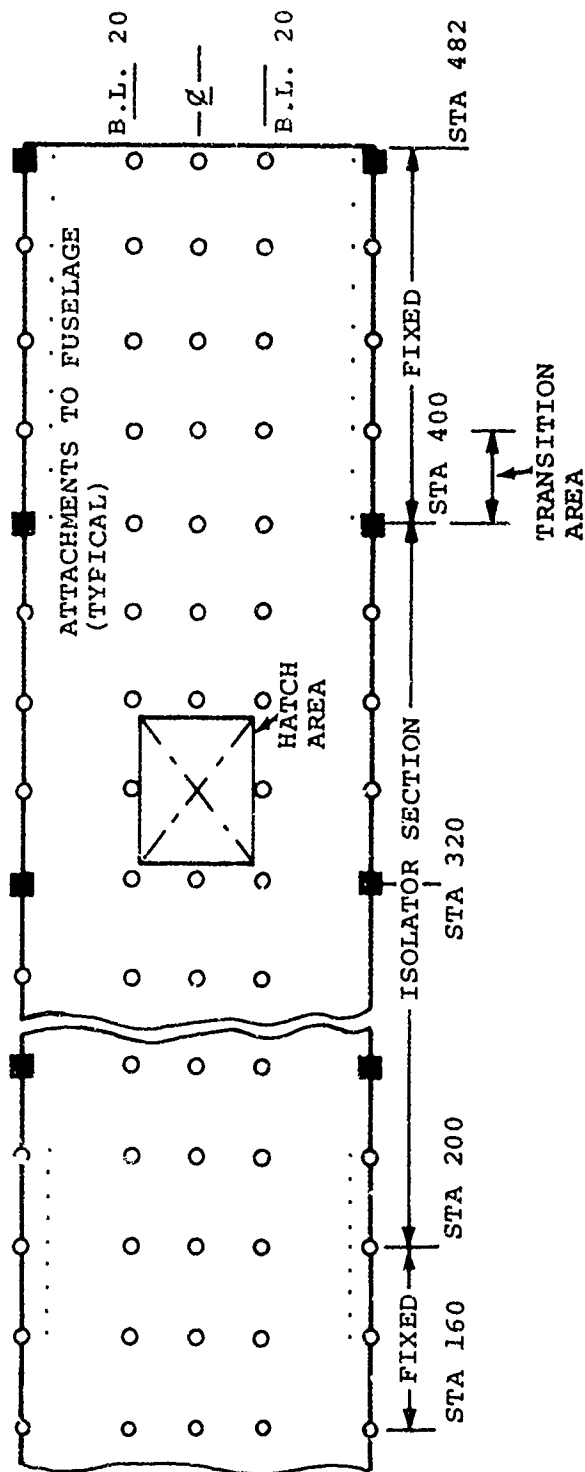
CH-47 Floor Section Tiedown Ring and Floor Frame.
